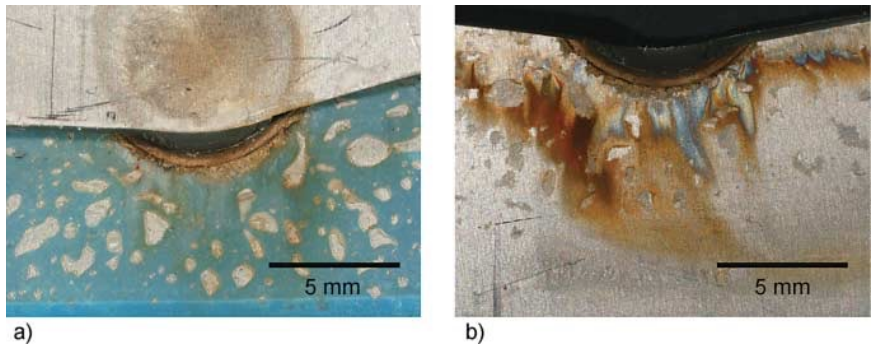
The failure of the adhesive layer of a corrosion-fatigue tested, weld-bonded specimen (EN 1.4301 2B). The specimen halves in a) and b) are opposite sides. The blue adhesive area at a) is on the non-loaded side of the specimen and b) is presenting the loaded side of the specimen. [Publ. III]
